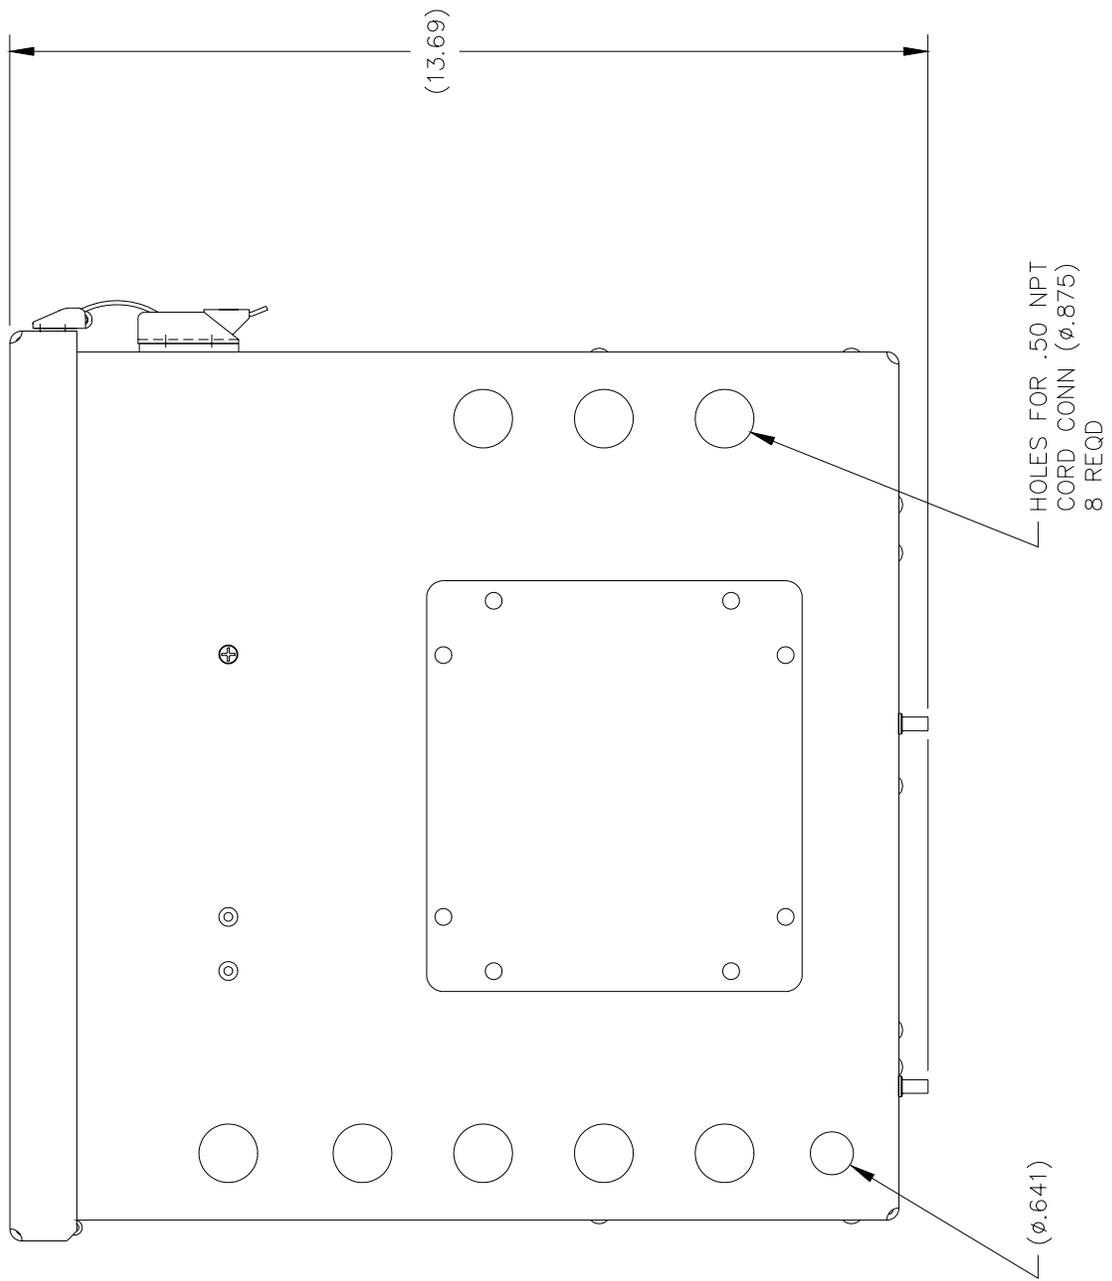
2 Bottom Dimension Drawing, Model 6790 RTU
